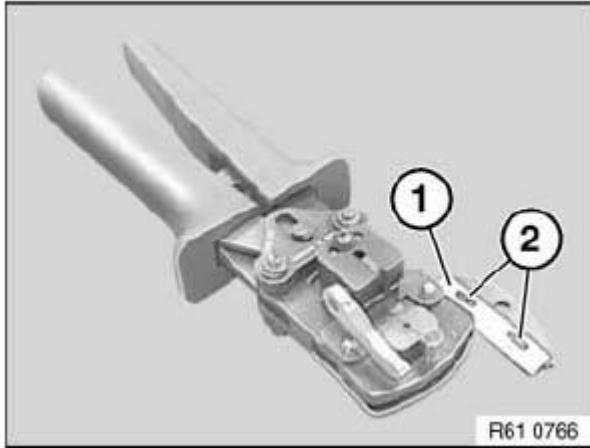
Identifying Blade Is Correctly Seated On Locating Points
